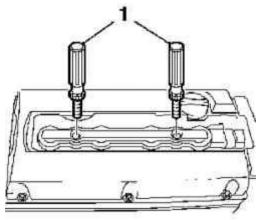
Removing the ignition module: 1 - bolts fastening
